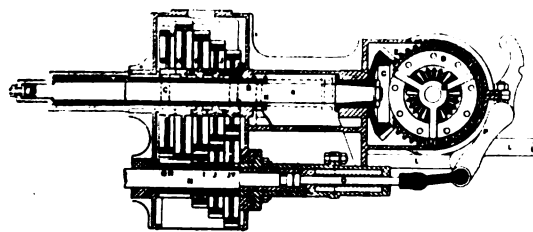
SECTIONAL VIEW OF VARIABLE-SPEED GEAR.
